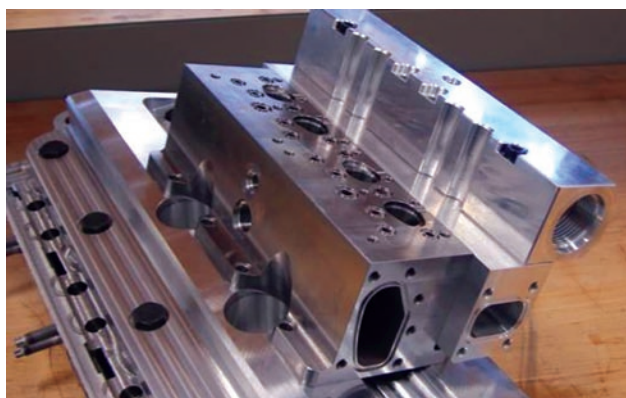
Test Fixture for Fully Flexible VVA Concept
